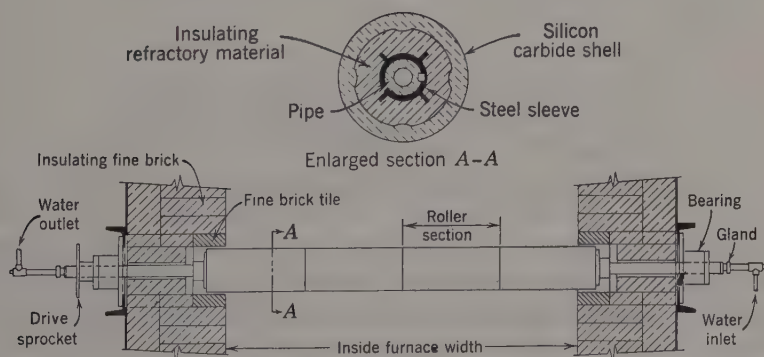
Furnace roller with shell of silicon carbide. Courtesy of Gas Machinery Co.
